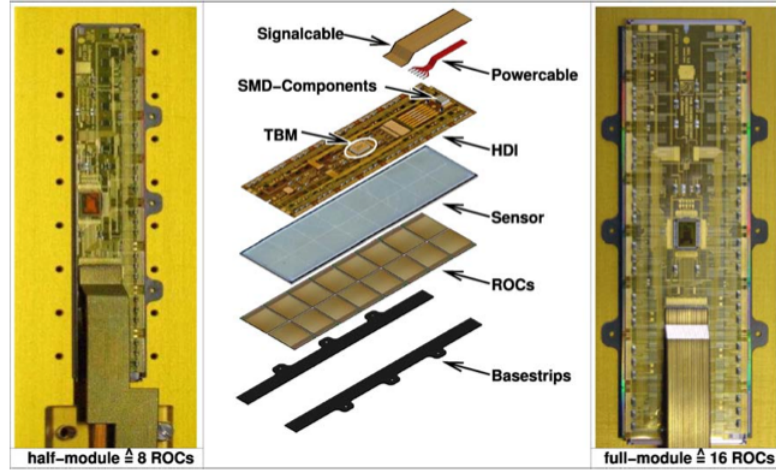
Exploded view (middle) of a barrel pixel detector full module (right).[5]
